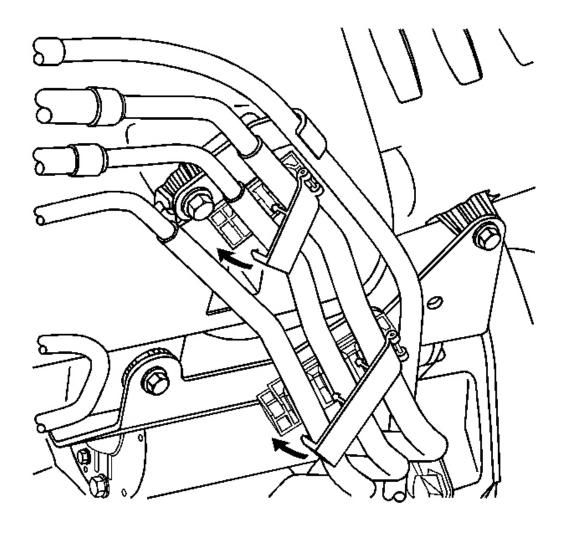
View Of Fuel Hoses & Retainers Courtesy of GENERAL MOTORS CORP.
